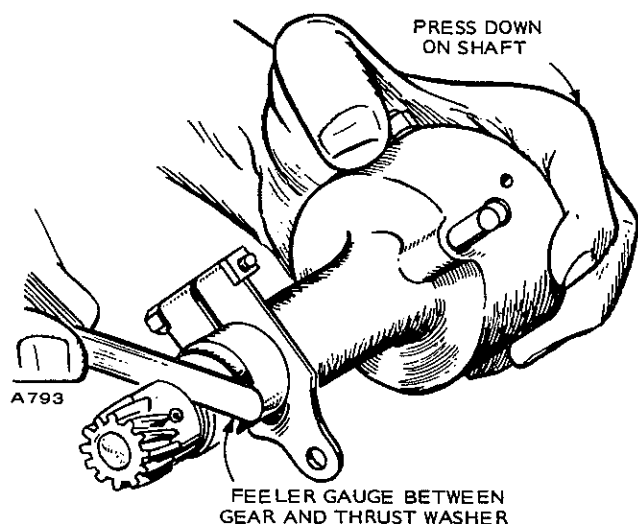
CHECKING DRIVE SHAFT END PLAY
